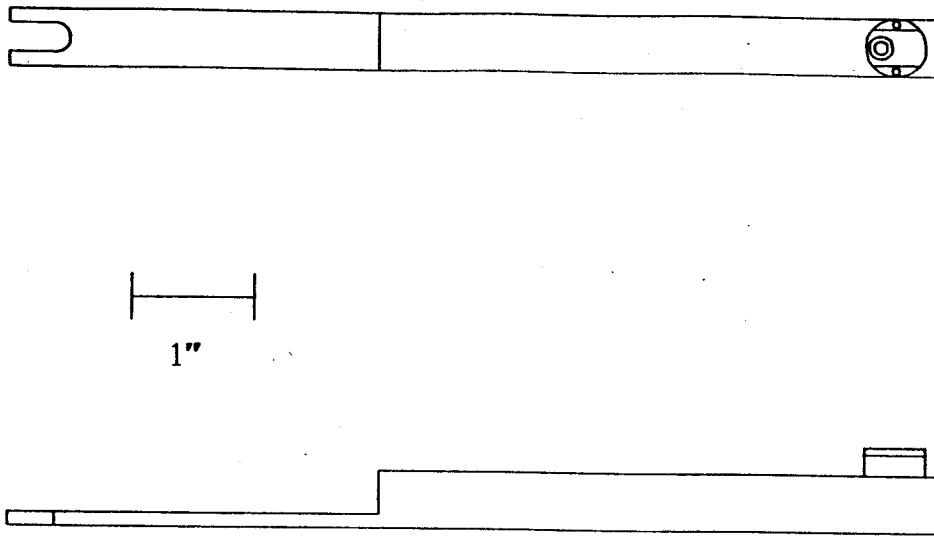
The fixture used for setting the angle of the drive. The cap on the end fits over the end of the shaft when the normal cap with pin is removed. The notch fits over the post on the center locating fixture so the rotation of the shaft is determined at either 0° or 180° .
